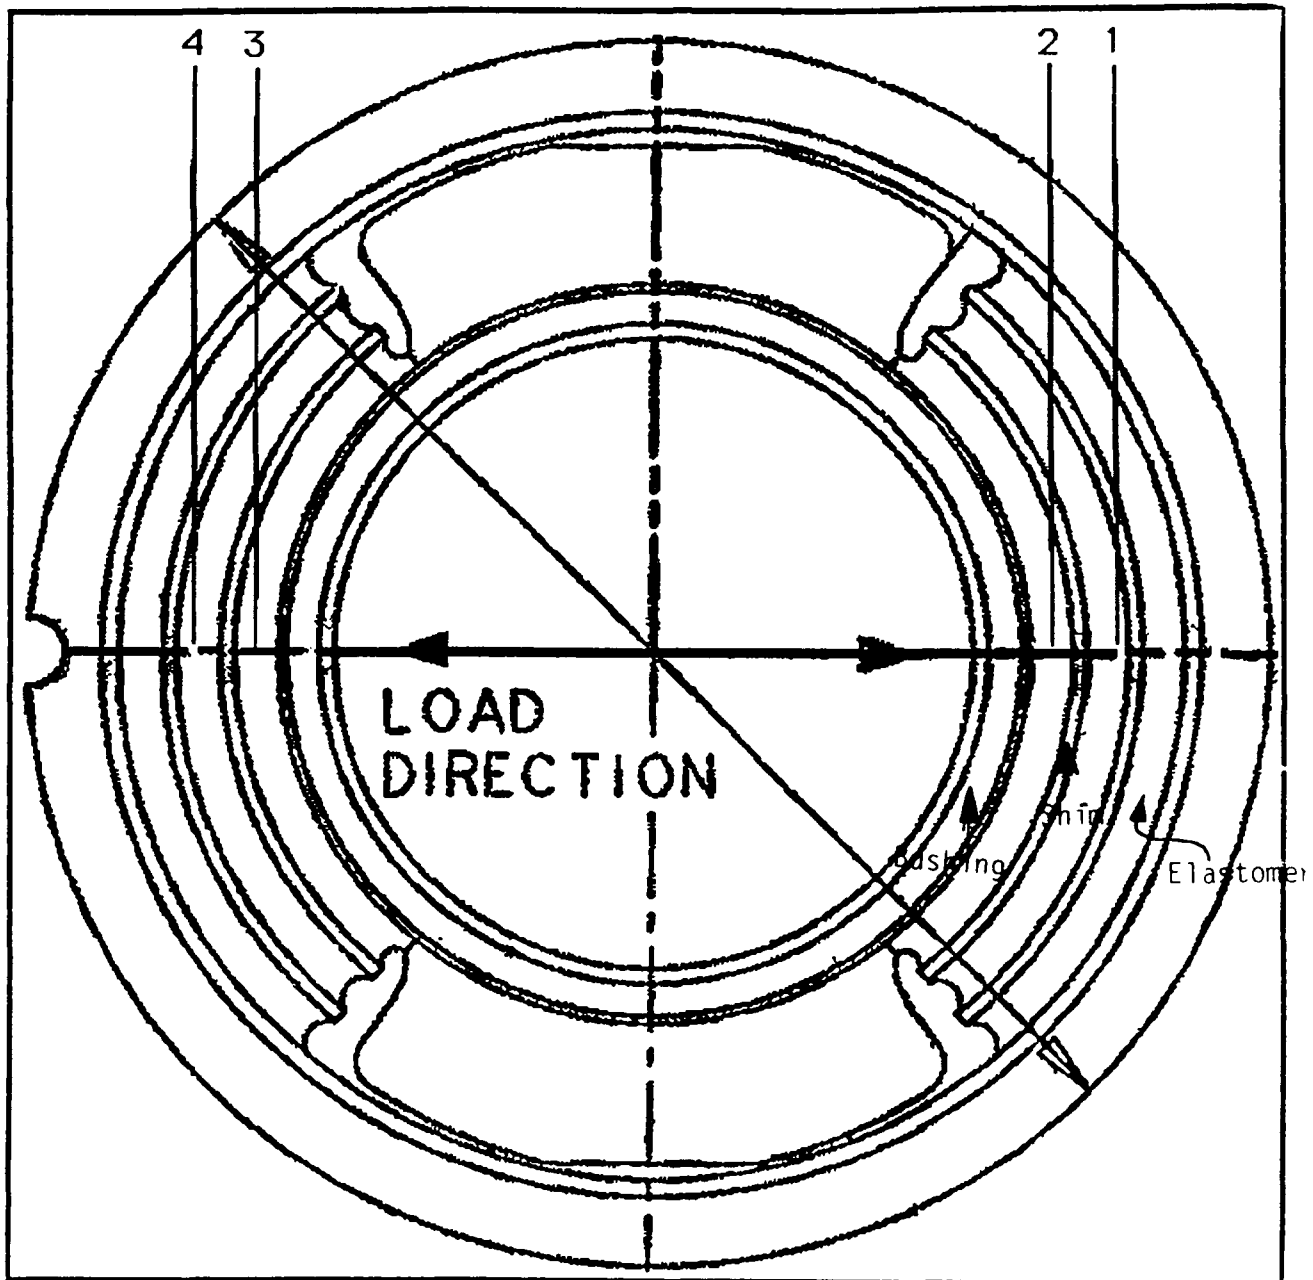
Schematic drawing showing the location of CT slices 1, 2, 3 and 4 on the drag brace bushing.
